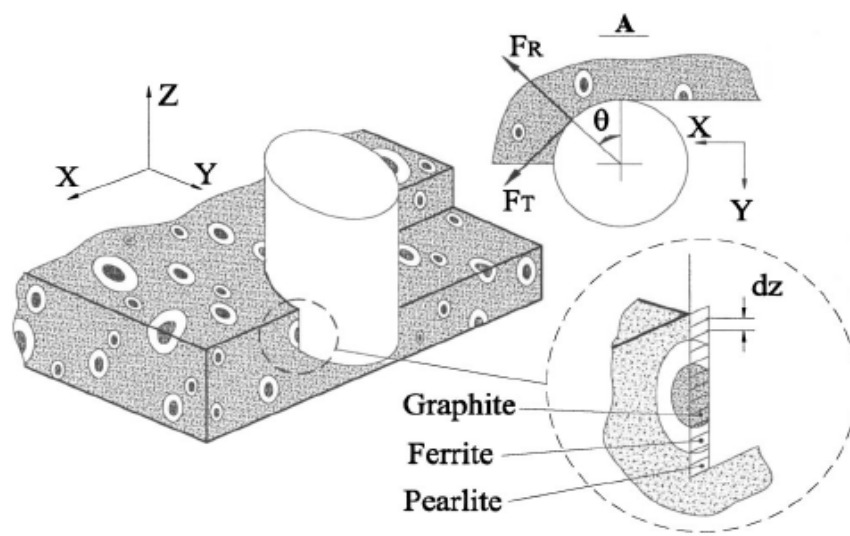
Tool workpiece engagement (Vogler *et al.* 2003).
